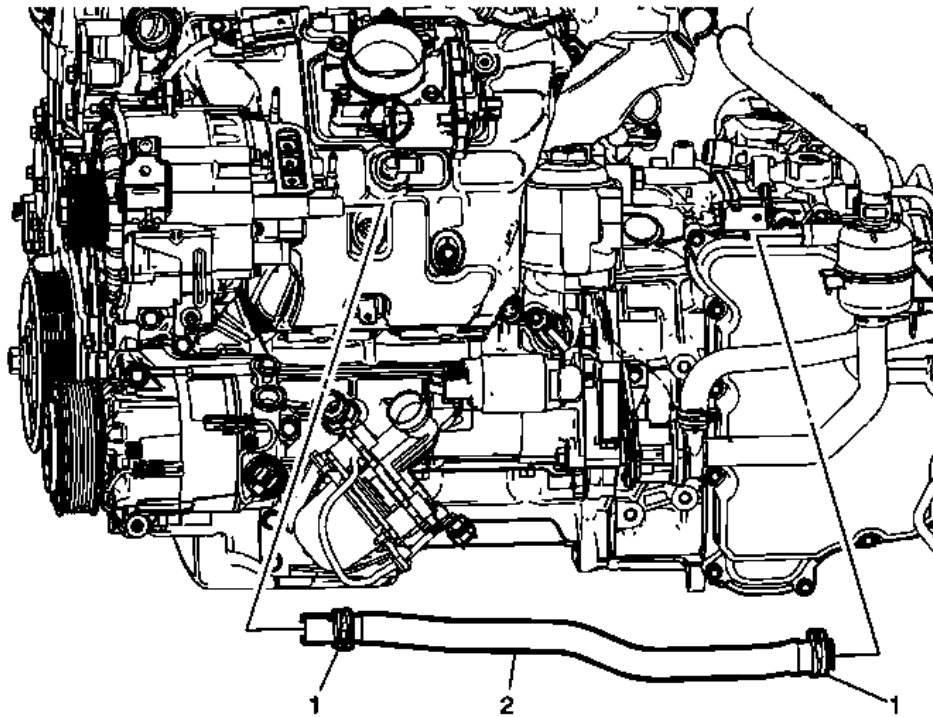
Generator Control Module Coolant Outlet Hose & Clamps
